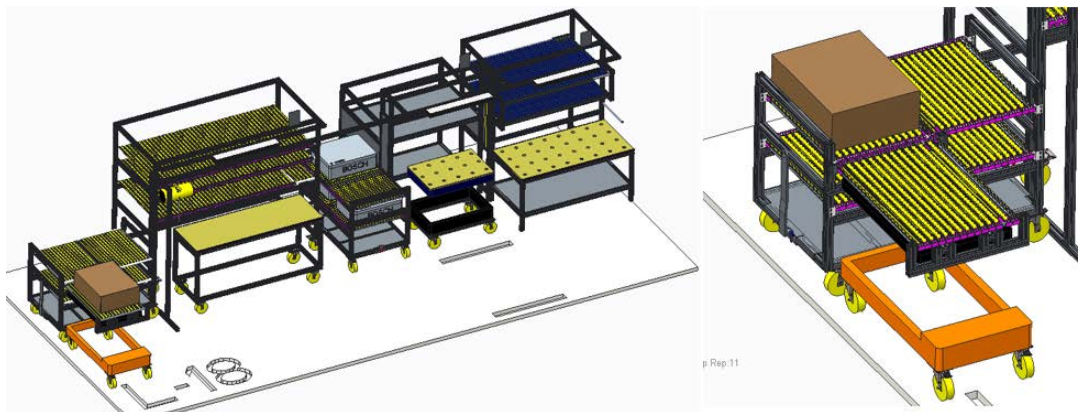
Transferring a packaged Integrus case form the trolley to the finished product car
